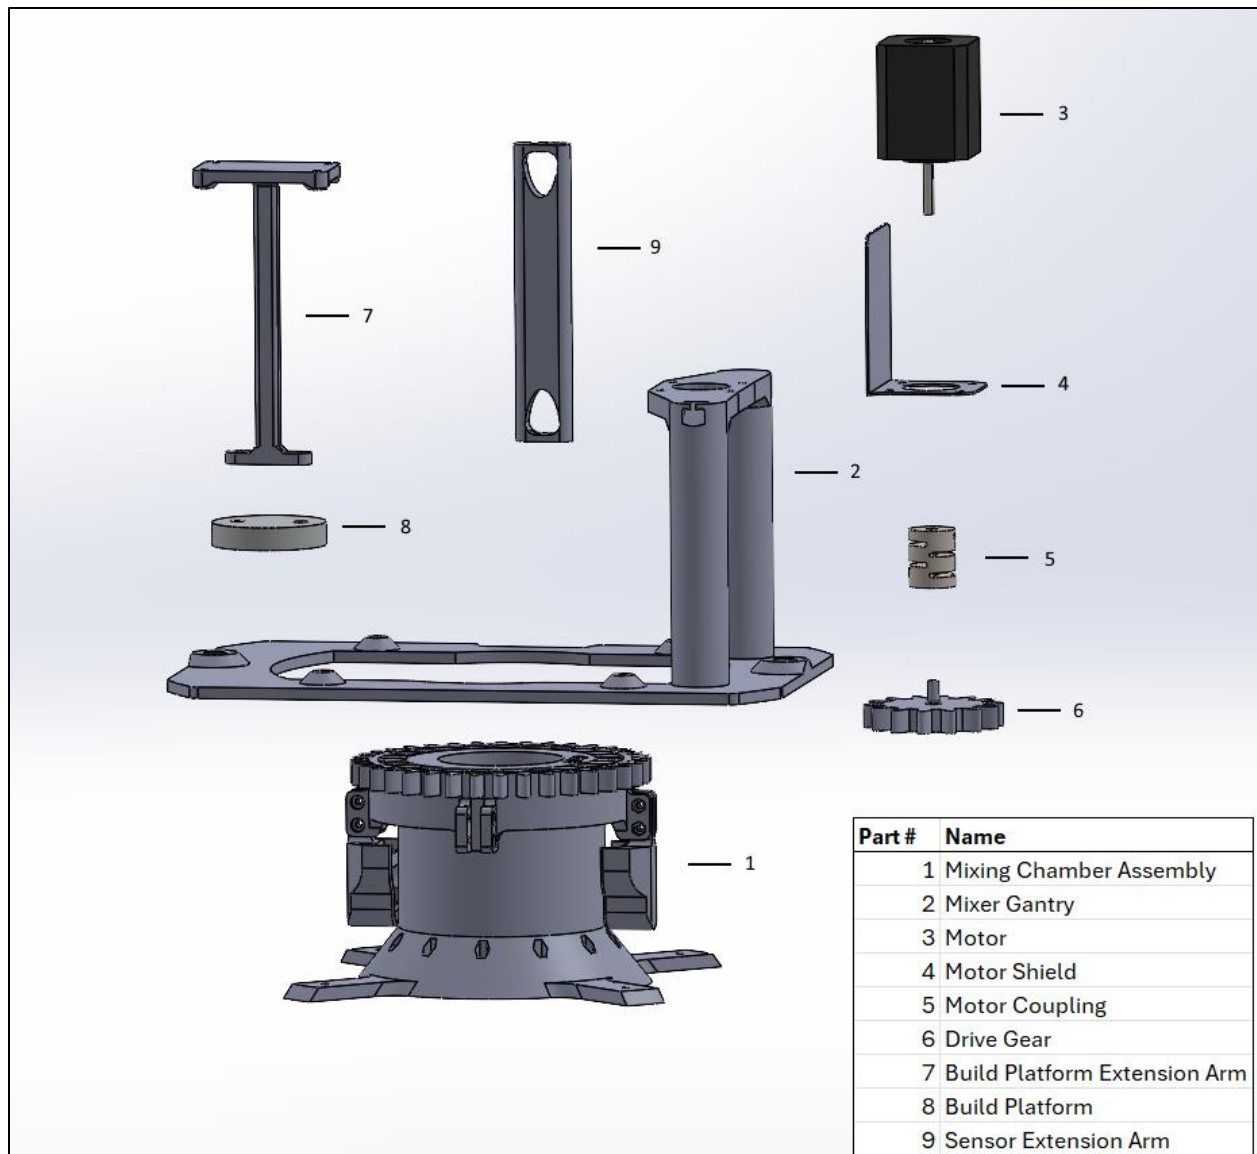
3D rendered exploded view of the mixing system and printer modifications.
